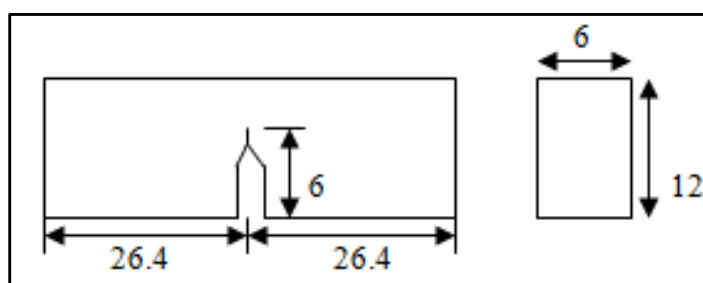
Sample specification of a Single Edge Notch Bend (SENB) specimen, all dimension (in mm)
